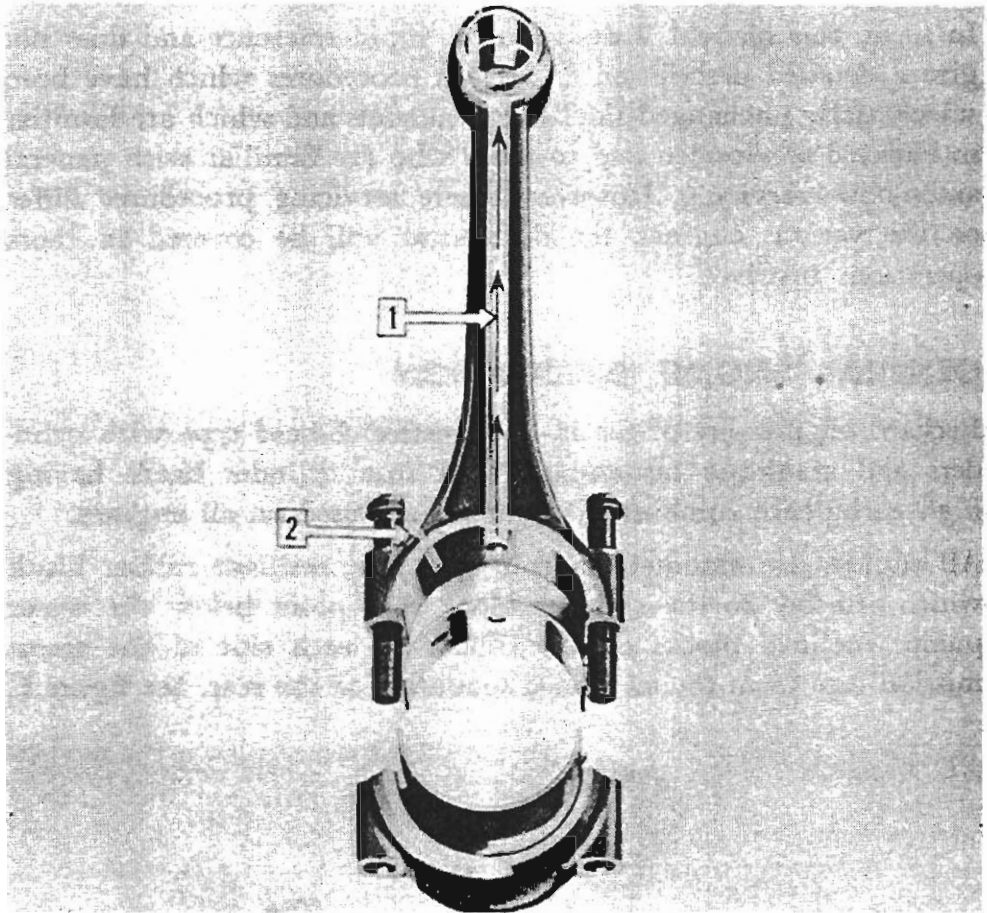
Exploded View of Connecting Rod and Bearing Assembly. Note the Drilled Oil Passages.
